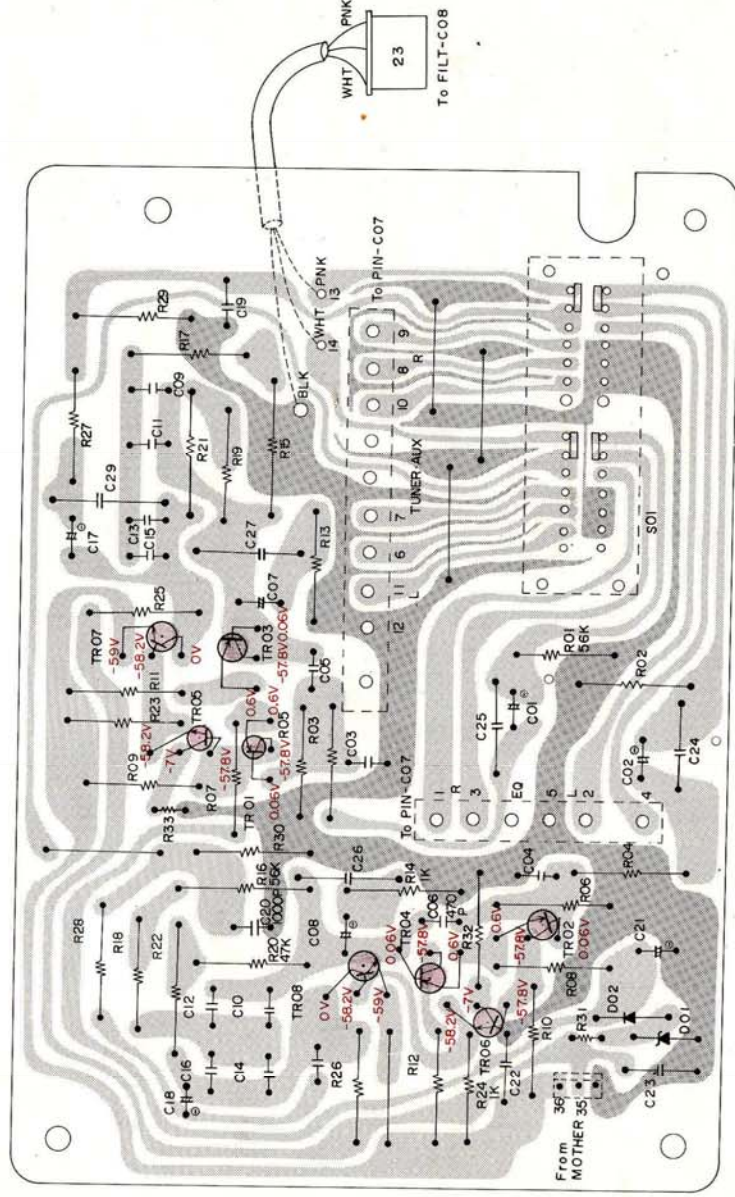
Solder Side of EQ-Amplifier P.C. Board (AF-C64)
